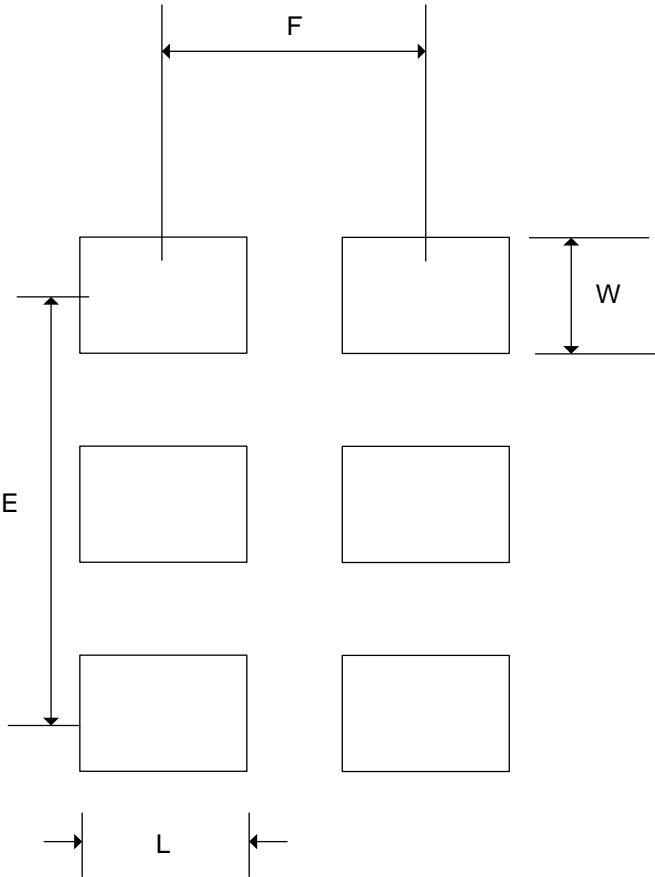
MS1150 Packaging Land Pattern Drawing (2.5X2.0 mm)
